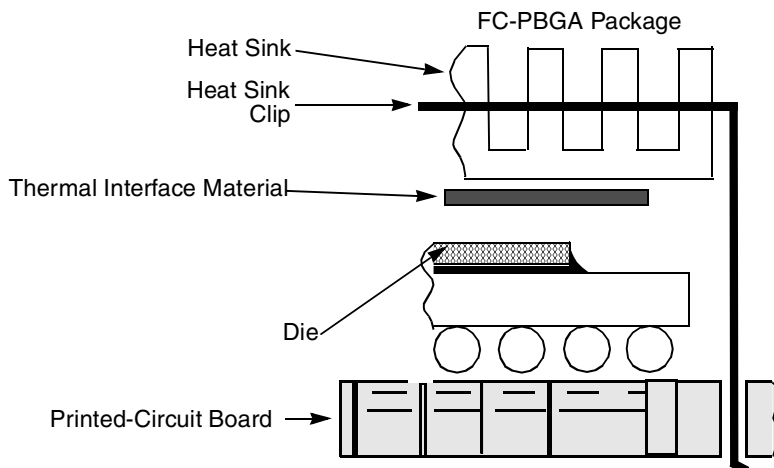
Package Exploded Cross-Sectional View with Several Heat Sink Options
